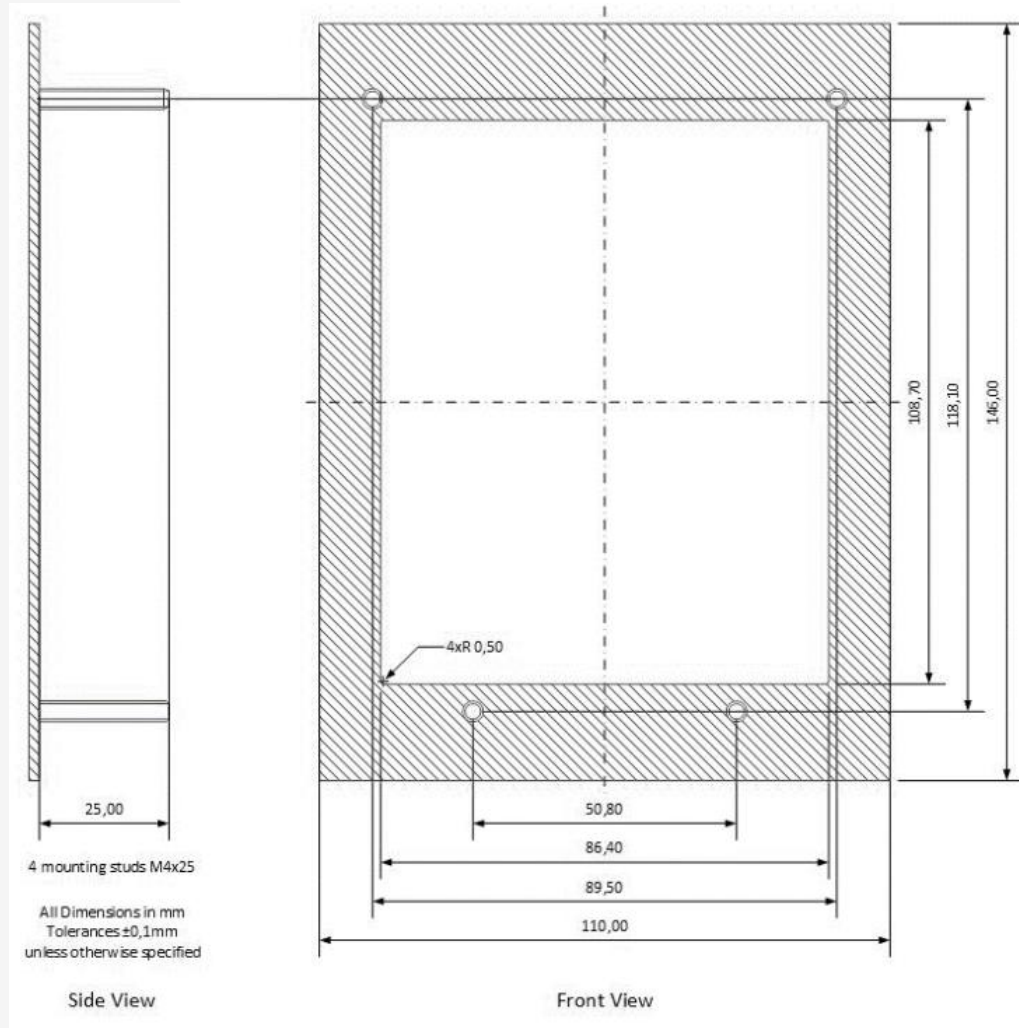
Dimensions of opening and weld studs (in millimeters)
